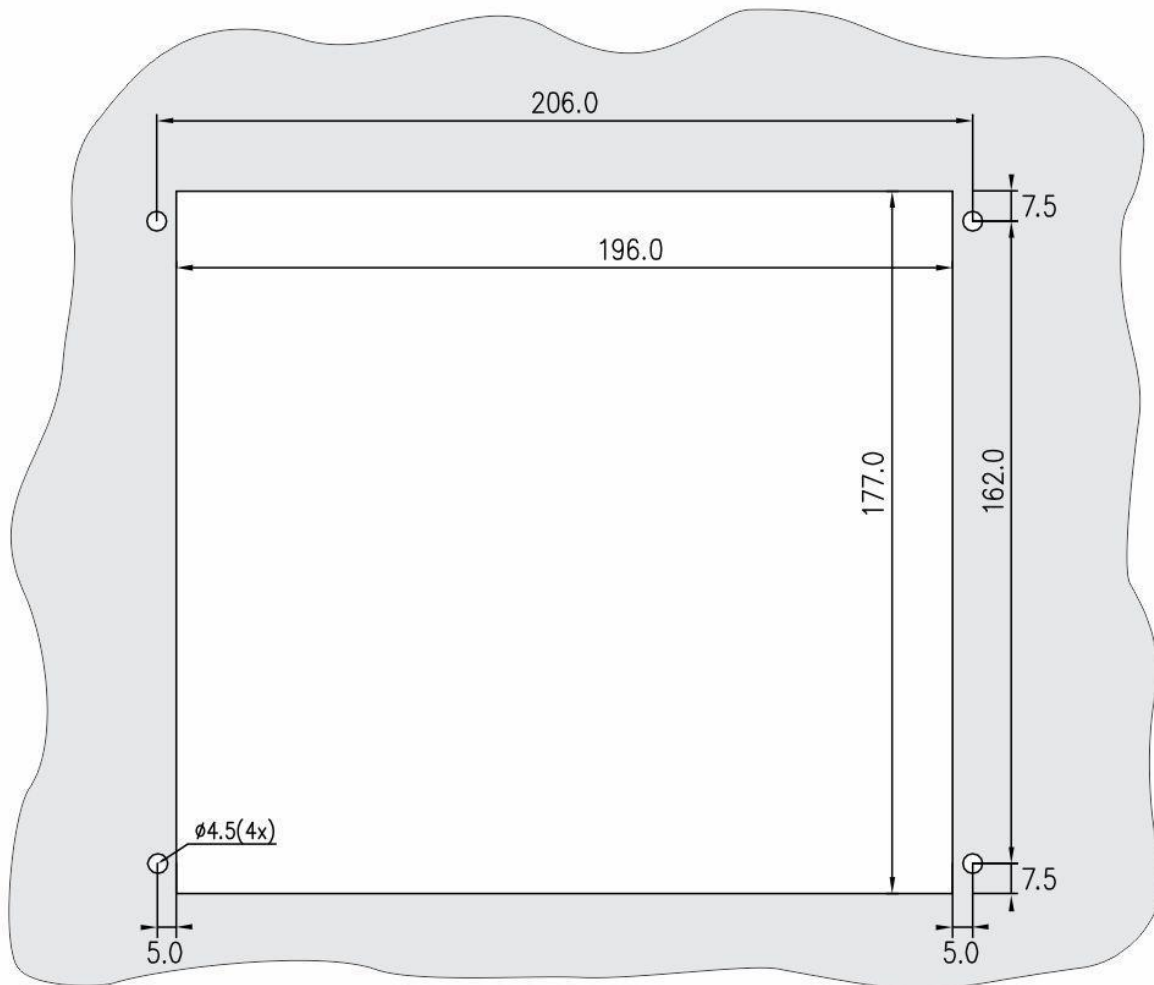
Recommended cut-out dimensions for FPC 680 / CAU 380 - L1(4)
